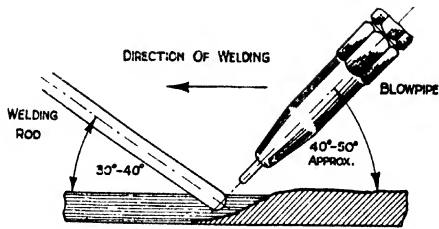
ANGLES OF ROD AND BLOWPIPE FOR DOWN-HAND WELDING ALUMINIUM BY THE LEFTWARD METHOD (*The British Oxygen Co., Ltd.*)
